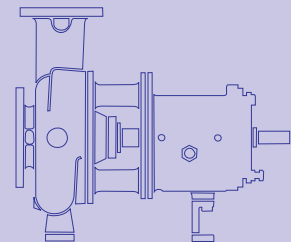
This new seal chamber and mechanical seal design will operate on 6% OD paper stock without flush water.
